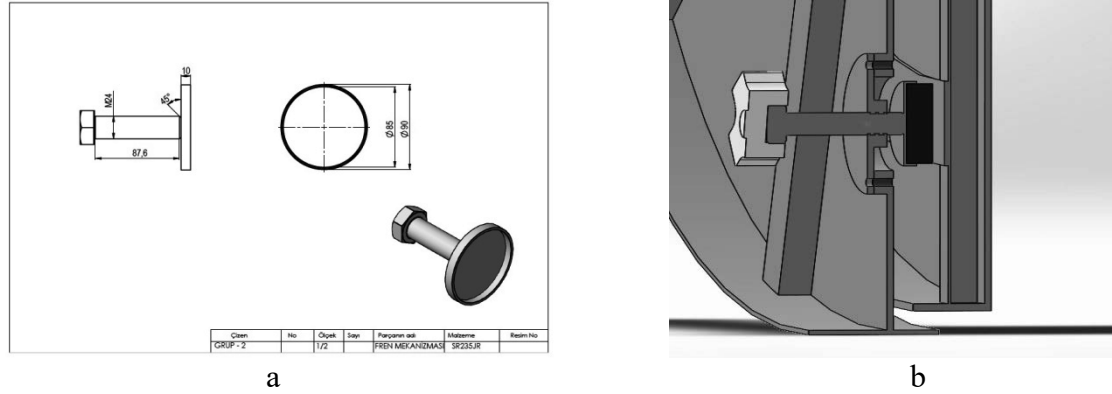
Brake mechanism technical drawing (a) and principle of brake mechanism (b)
